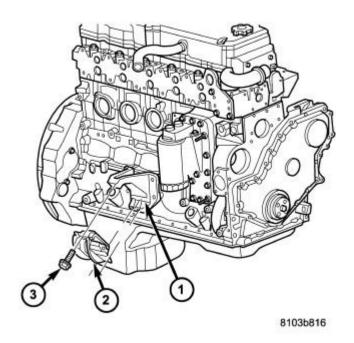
Mount, Insulator & Bolt Courtesy of CHRYSLER GROUP, LLC
